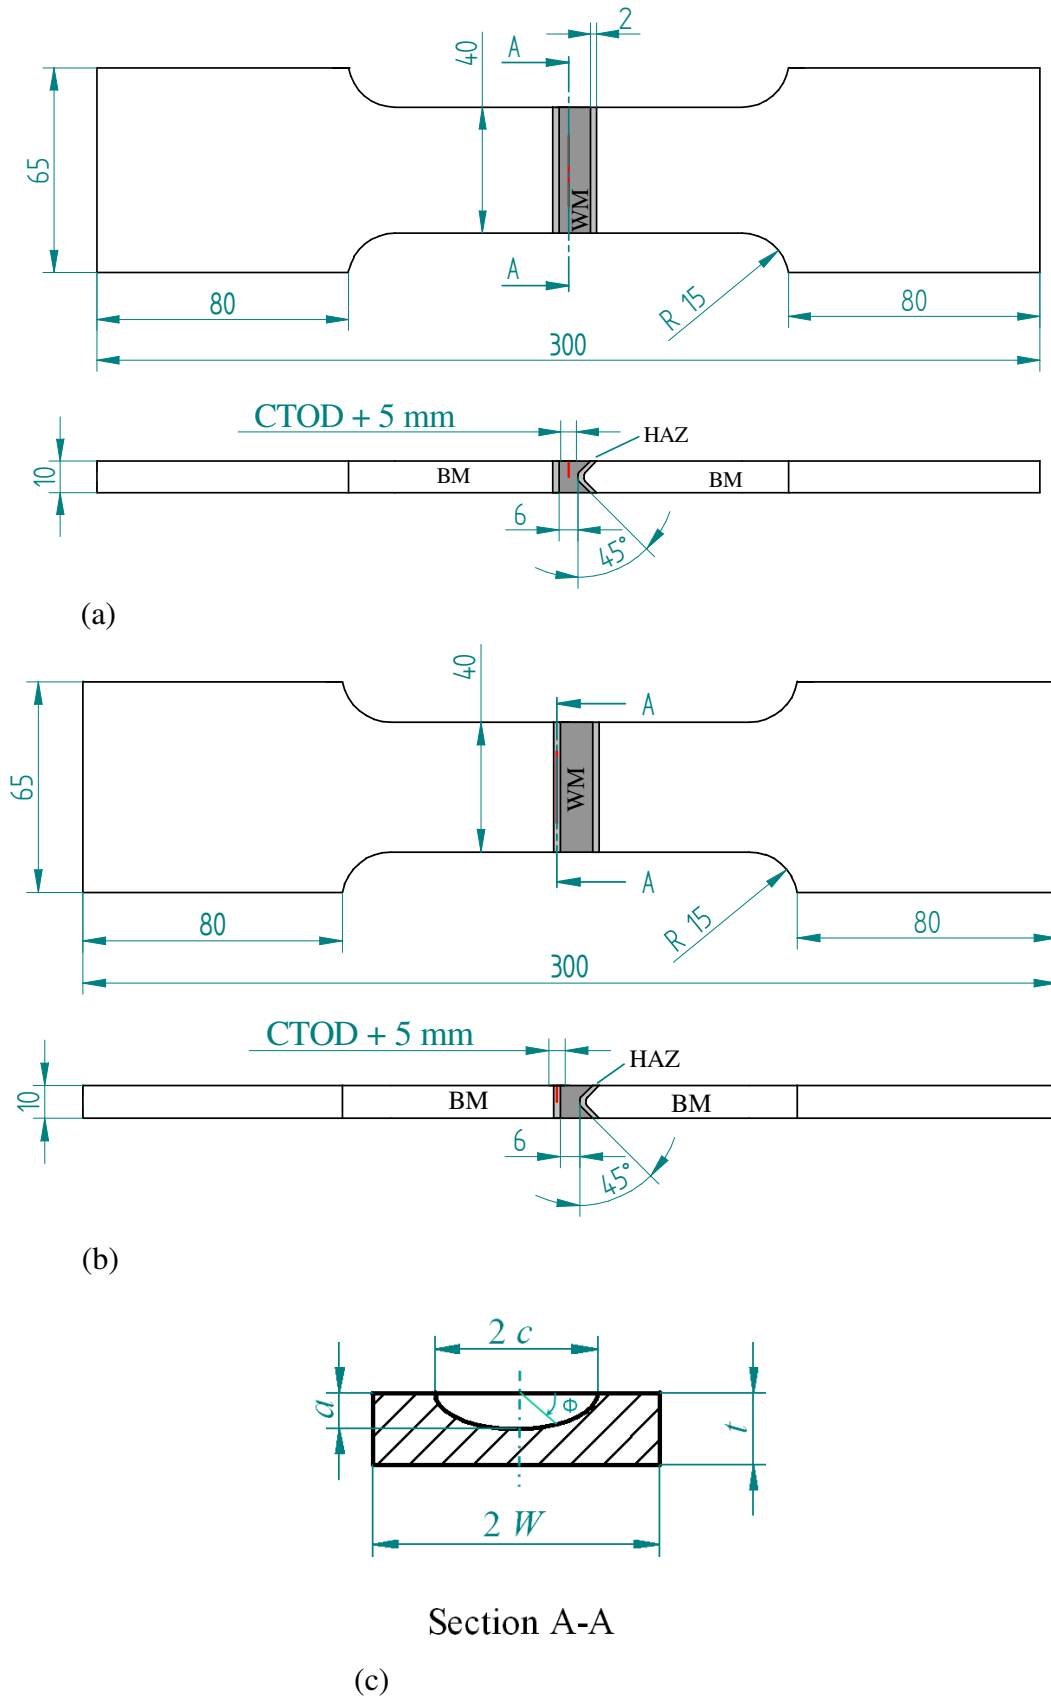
Geometry of welded tensile specimens: (a) tensile panel with semi-elliptical surface crack in WM. (b) tensile panel with semi-elliptical surface crack in HAZ and (c) geometry of semi-elliptical crack.
